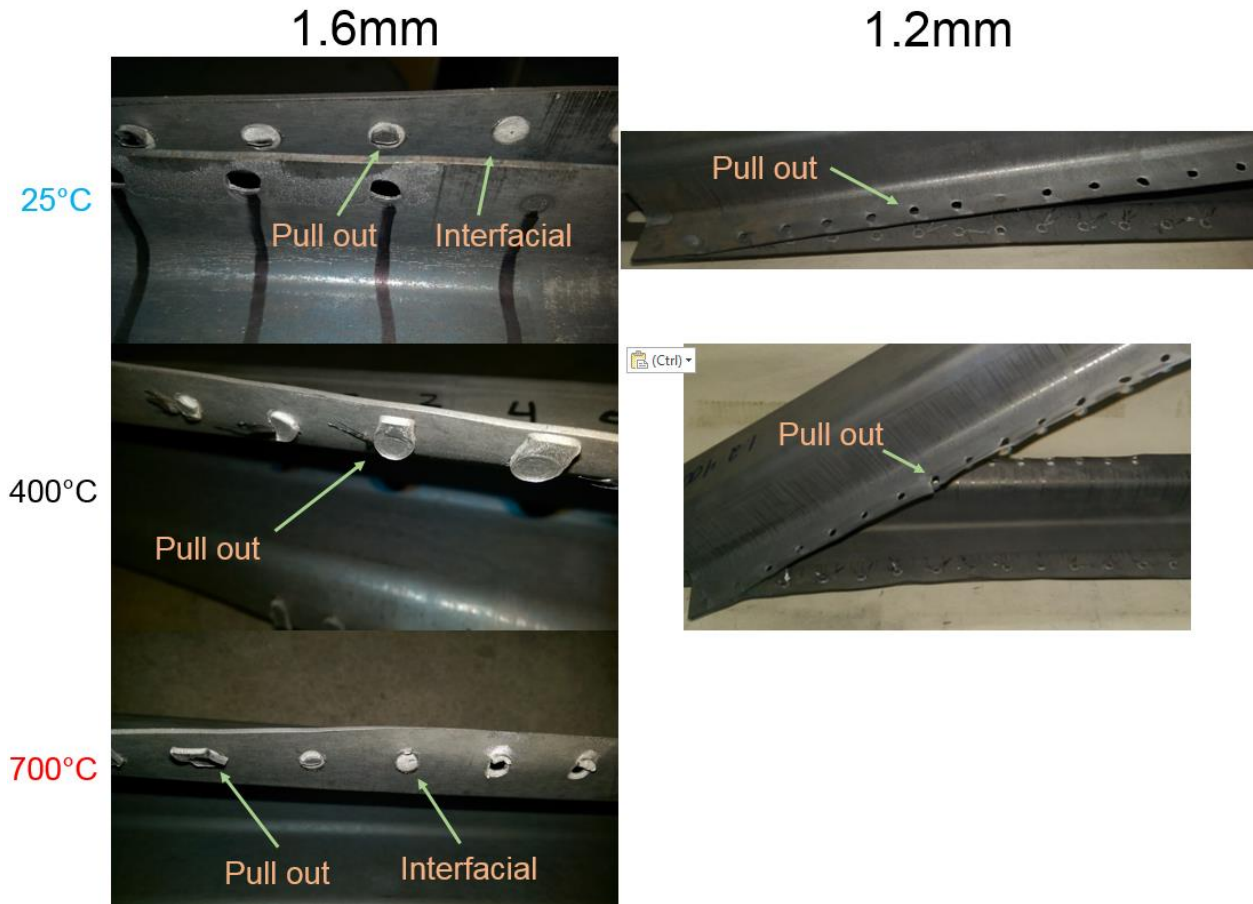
Weld failure modes from quasi-static caiman tests
